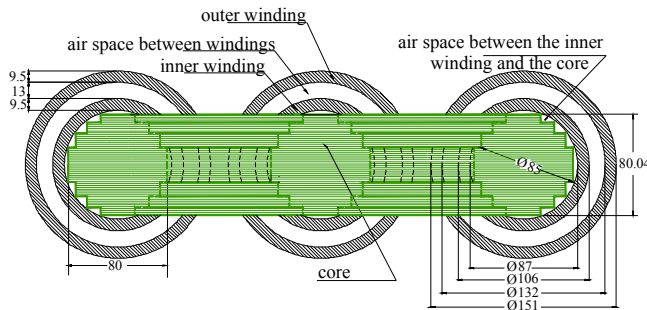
An internal upper view of the transformer (dimensions in millimeters).
